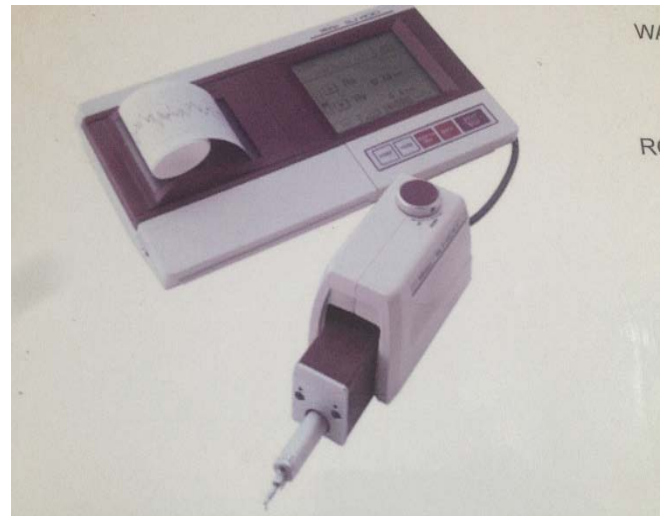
Surface roughness testing machine(Mitutoyo SJ-201)
